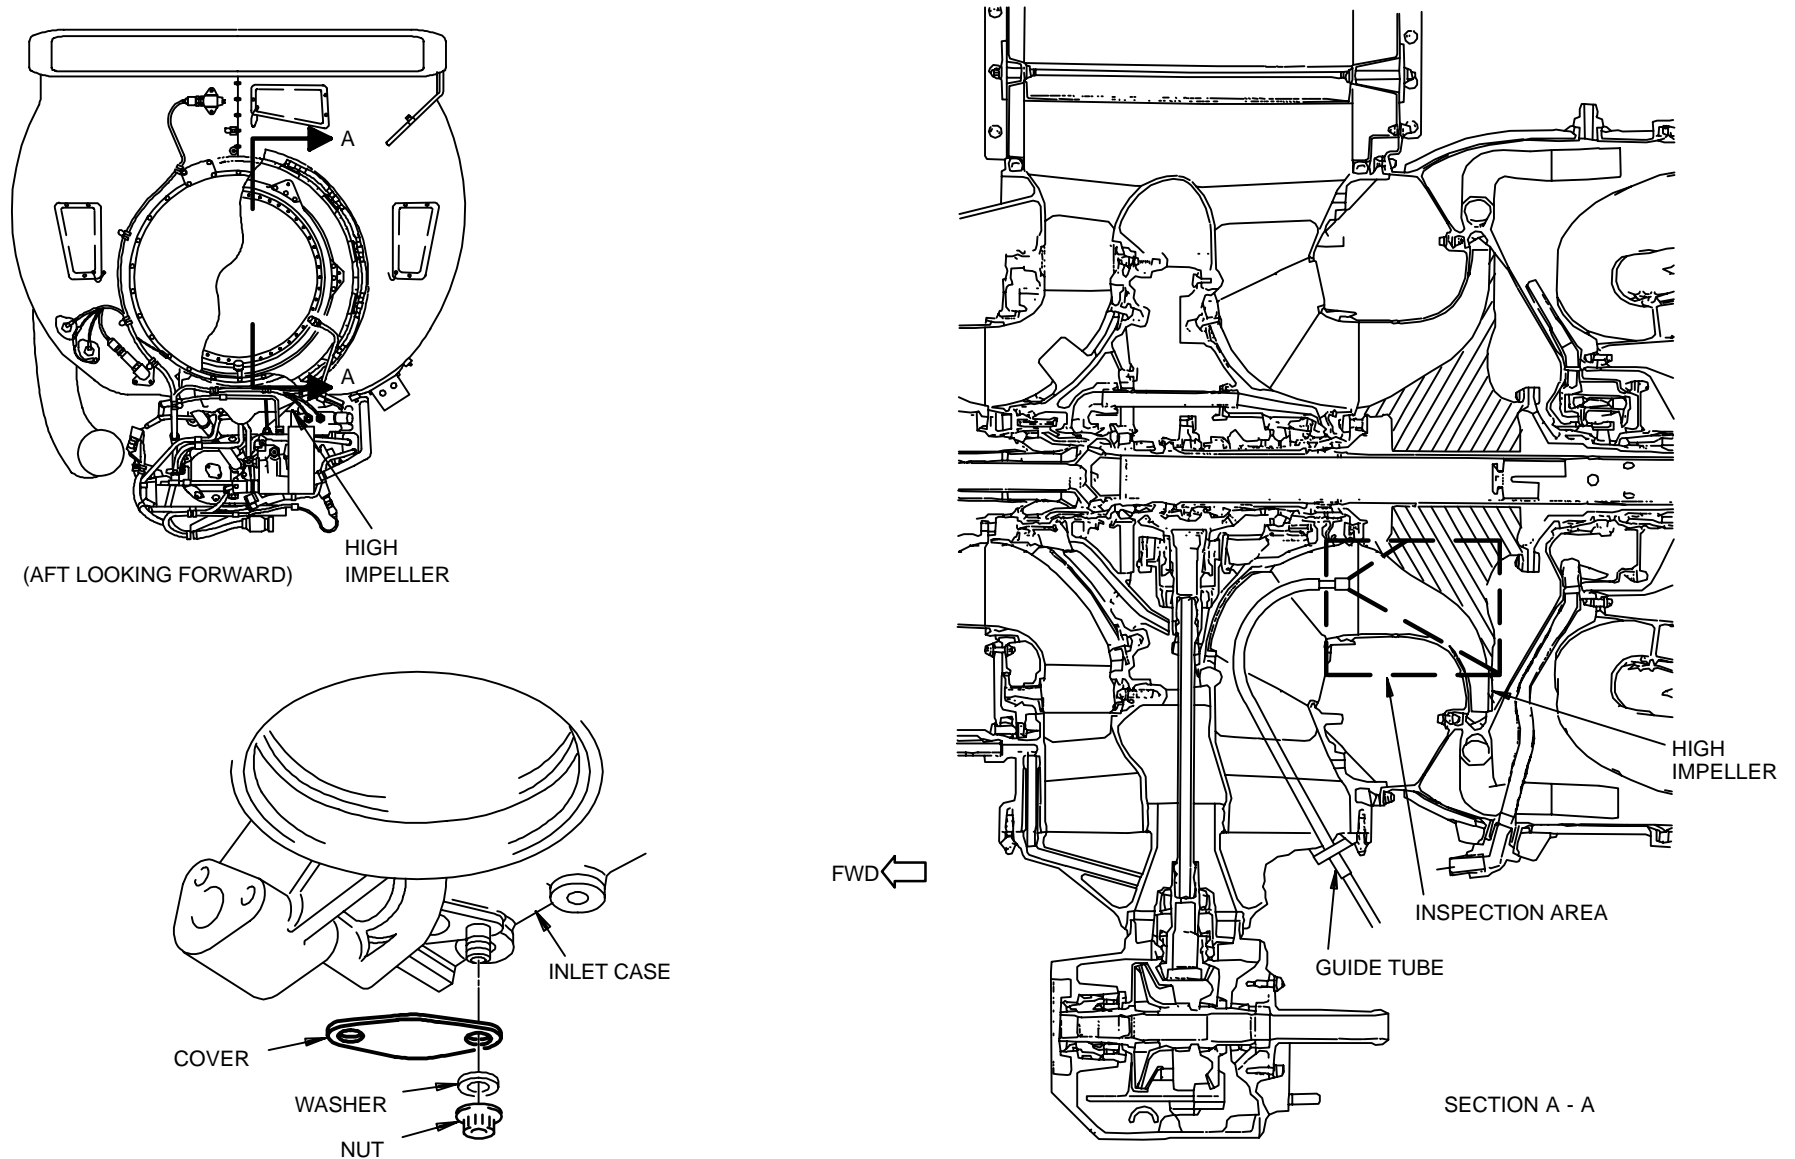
HIGH IMPELLER BORESCOPE INSPECTION
